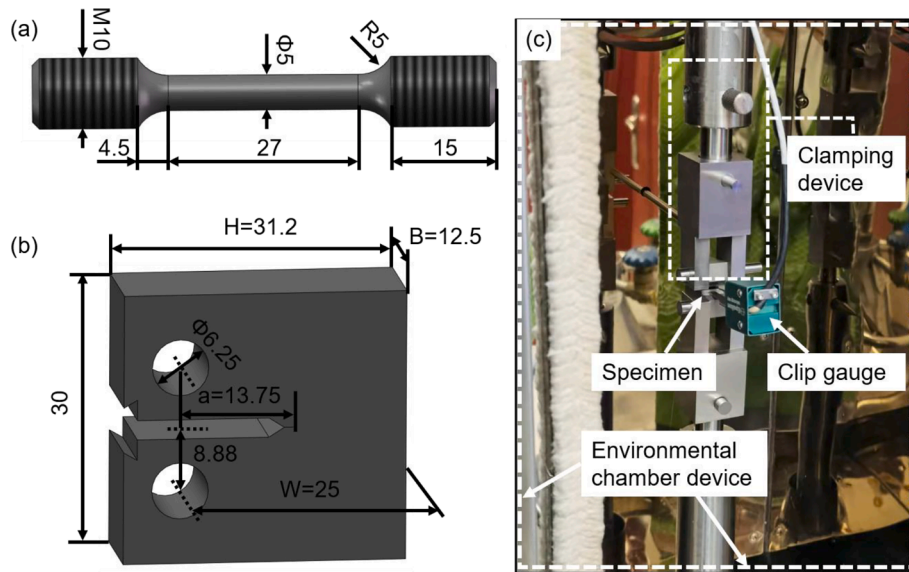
Geometry and schematic description of (a) the tensile specimen, (b) the standard 1/2 T specimen (dimension in mm), (c) fracture toughness test setup.
